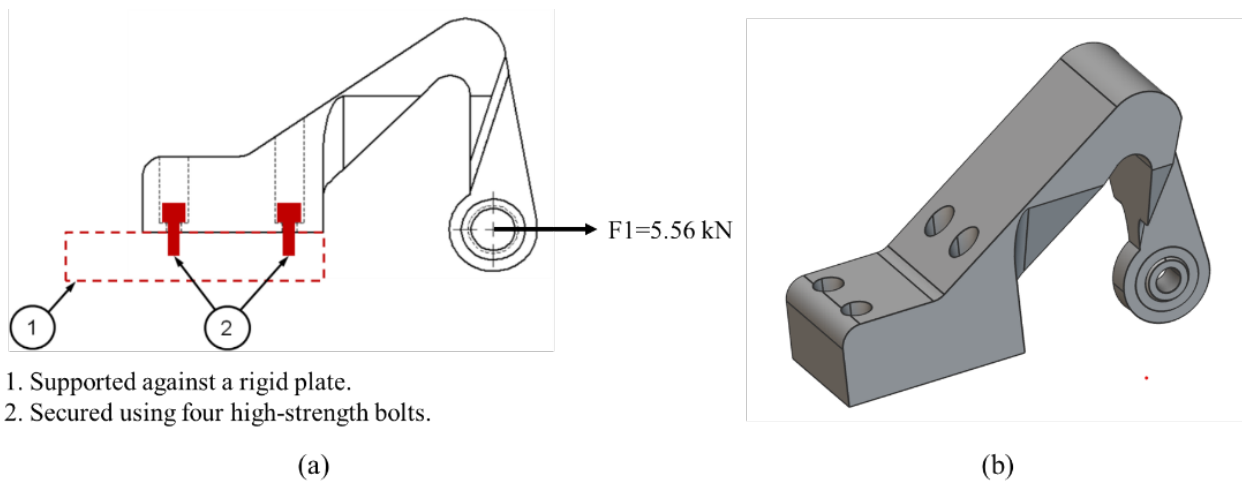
Baseline airplane bearing bracket and setup: (a) Schematic showing the bolted support region on a stiff plate and the applied load at the bearing interface, (b) 3D CAD model of reference bracket geometry.
